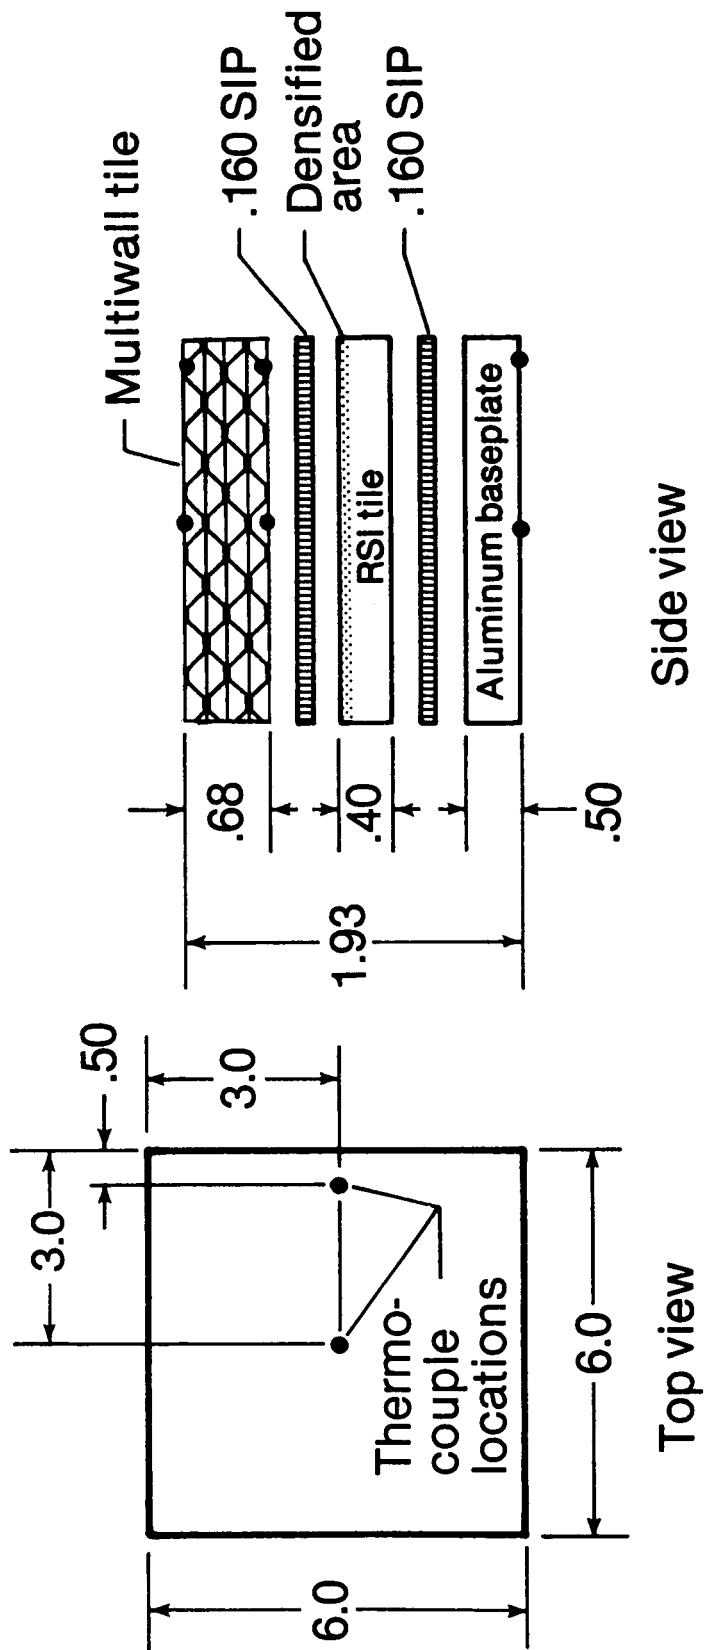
Test specimen. Surfaces bonded with RTV-560 adhesive. Dimensions in inches.
